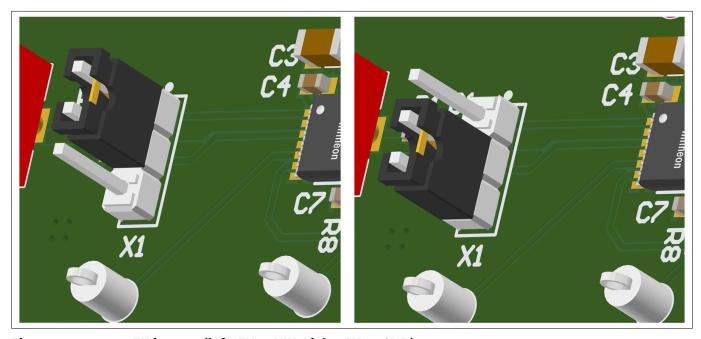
EN jumper (left: EN to VIN; right: EN to GND)
